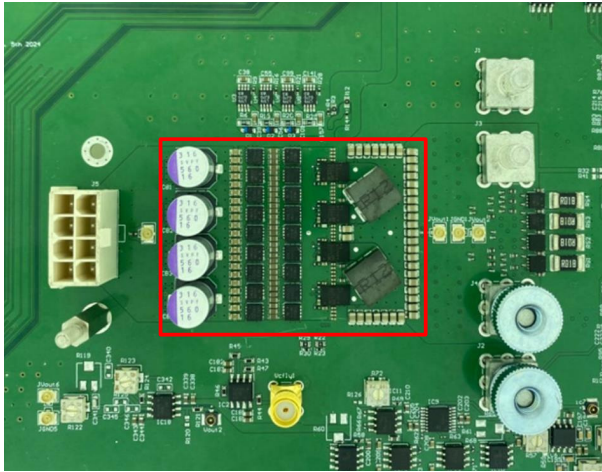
Photo of assembled PCB of the 3-level 4-phase converters. The converter part (in red square) is 54 mm  $\times$  38 mm.
